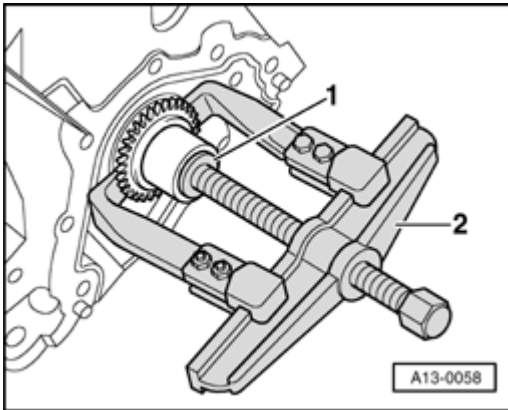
Pulling Off Chain Sprocket From Crankshaft
